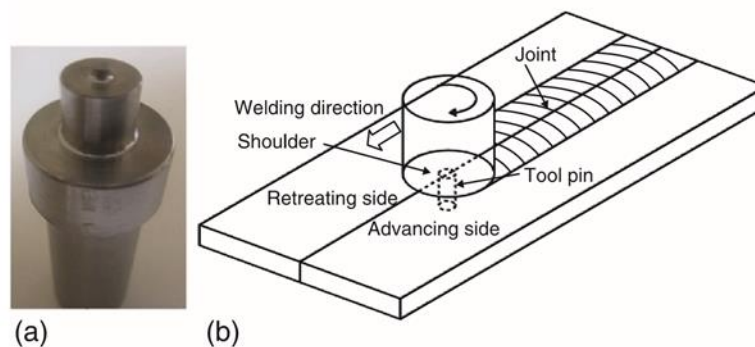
(a) A FSW tool; and (b) Schematic of FSW process [21]
